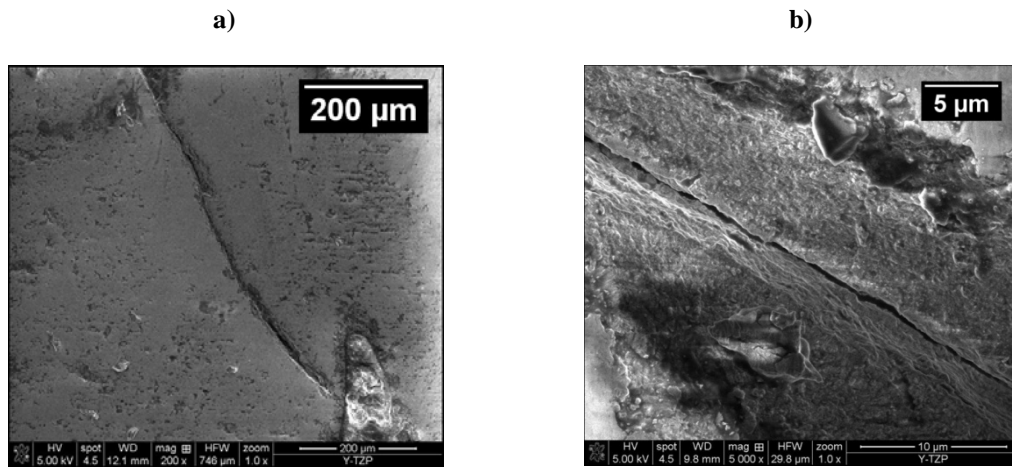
SEM images of crack 2: a) crack propagating away from the laser drilled hole; b) zoom in on the crack air gap.
